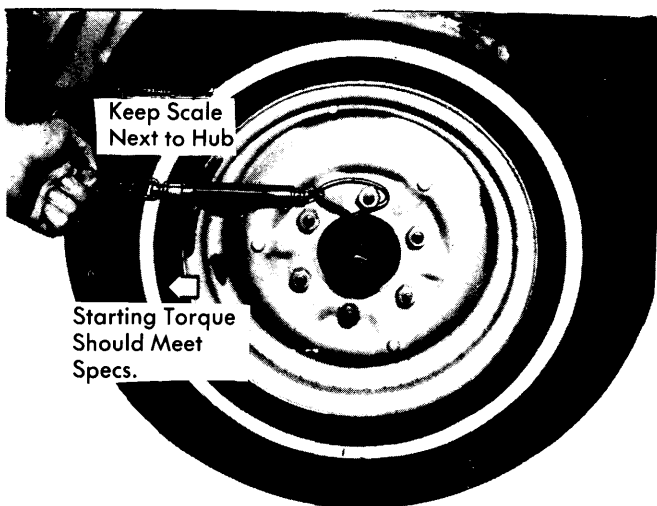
Using a Pull Scale to Measure Wheel Bearing Starting Torque
